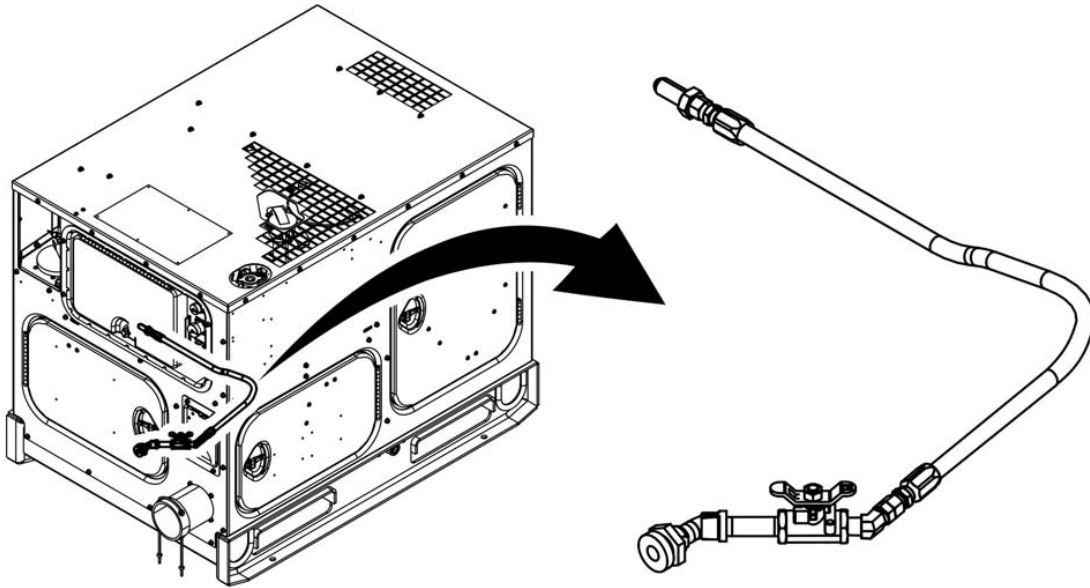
Fuel Tank Drain Valve Assembly - Location.
